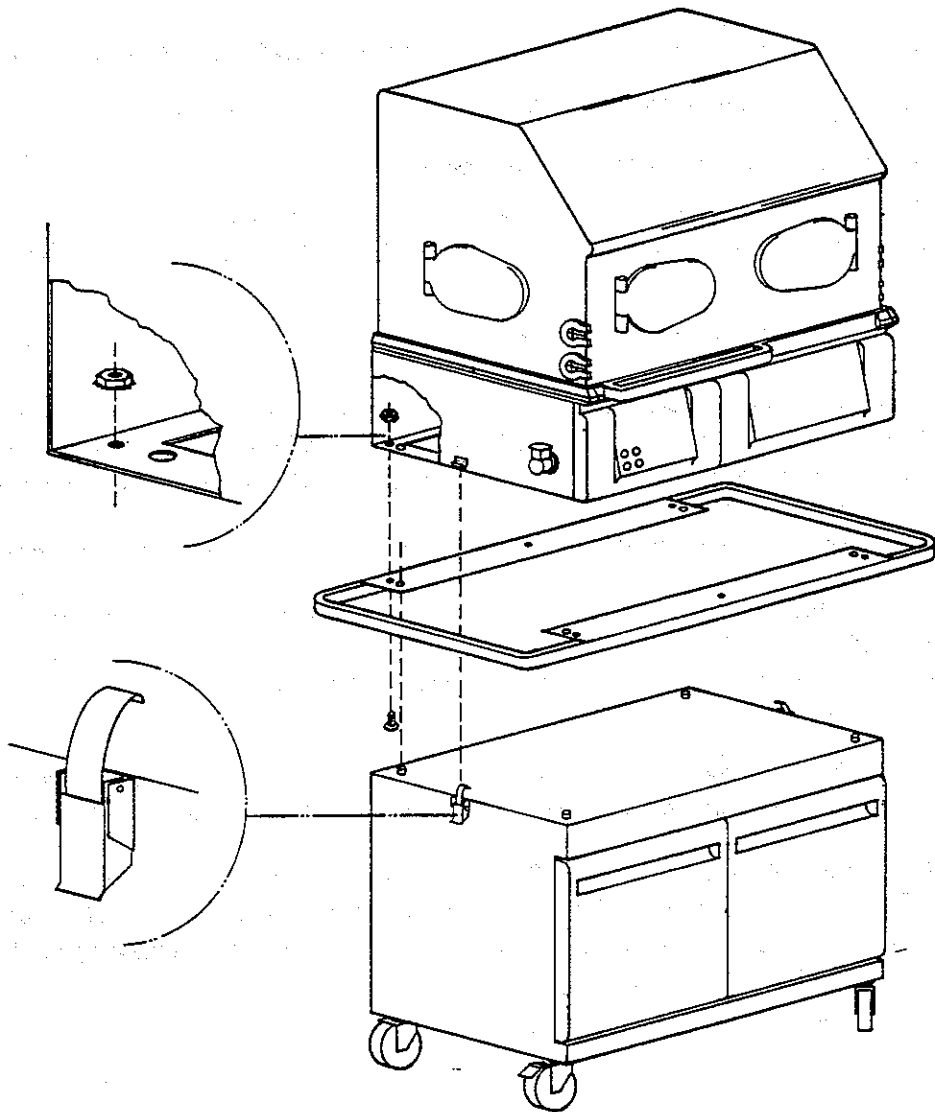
ASSEMBLY, INCUBATOR MOUNTED ON A STANDARD CABINET STAND
